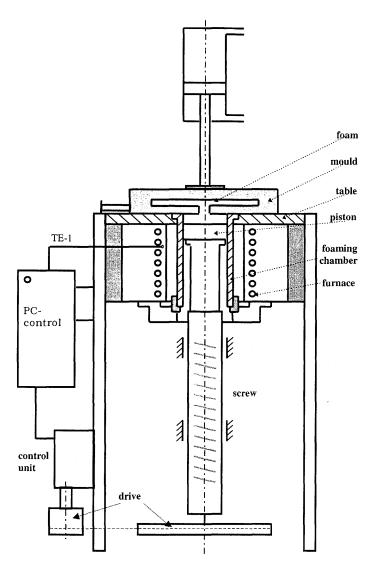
The scheme of the casting machine for injecting of aluminium foam
